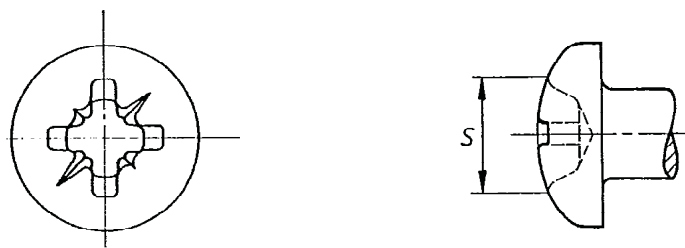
Recessed pan head machine screws: enlarged views of recess type V
